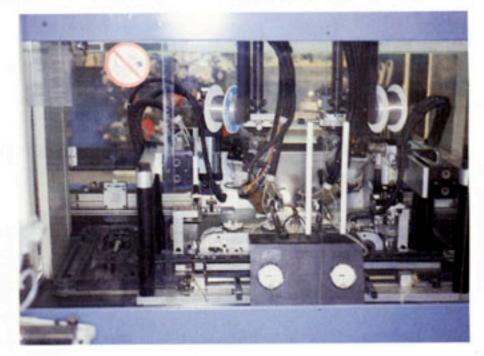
A / 6B. Assembly of magnetic circuit breakers is made on a fully automated production line. The insulation of the magnet wire is solderable. Both joints are soldered simultaneously with two flames. Each flame is supplied from a separate SPIRFLAME® to allow maximal flexibility in computer programme controlled flame adjustments.
